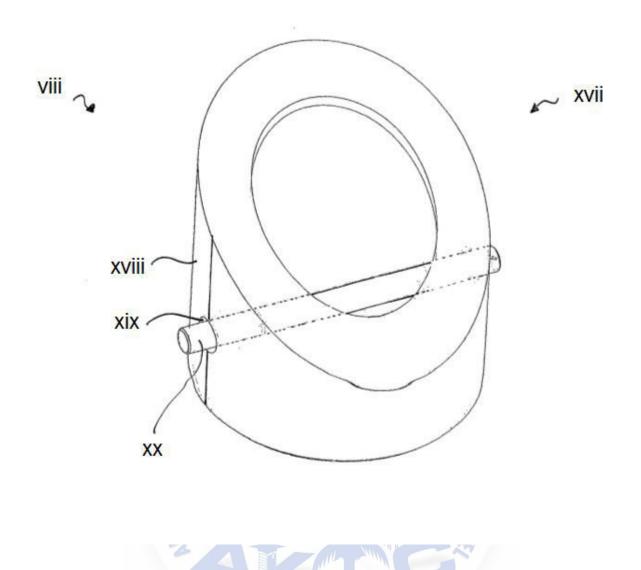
A socket lining of a stator or a rotor of the magnetic
